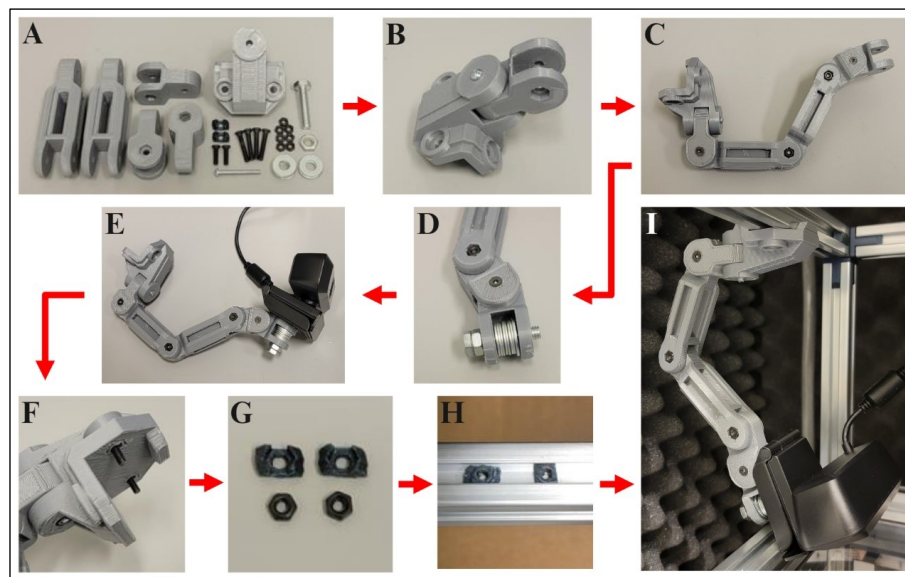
Instructions for assembling the camera mount. A) Gather the 3D-printed camera mount pieces, M3 10 mm machine screws (2×), M3 20 mm machine screws (4×), M3 30 mm machine screw (1×), M3 nuts (7×), ¼ in. diameter 20 threads/inch 1 in. long bolt (1×) with corresponding nut (1×) and washers (8×), and camera (1×). B) Connect the T-Slot mounting piece to the first segment of the articulating arm with the M3 30 mm screw and nut. C) Connect the remaining articulating arm pieces with the M3 20 mm screws and nuts. D) Thread the 1 in. bolt through the last articulating arm segment with a nut at the bolt's base and eight washers filling the gap. E) Screw in the camera's base to the threaded end of the exposed 1 in. bolt. F) Place two of the M3 10 mm screws through the holes of the plastic T-Slot rail mounting piece. G) Fit an M3 nut into each of the two small T-Slot rail adapter pieces. H) Slide the assembled T-Slot rail adapter pieces into the groves of the T-Slot rail (left) and rotate them 90° to lock them into place (right). I) Align the M3 10 mm screws within the T-Slot rail mounting piece with the T-Slot rail adapter pieces and screw them in, mounting the camera arm to the rail.
